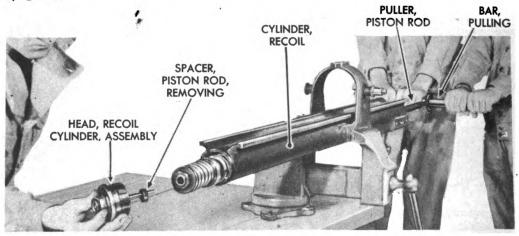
Removing the Recoil Cylinder Head Assembly and Piston Rod Removing Spacer
